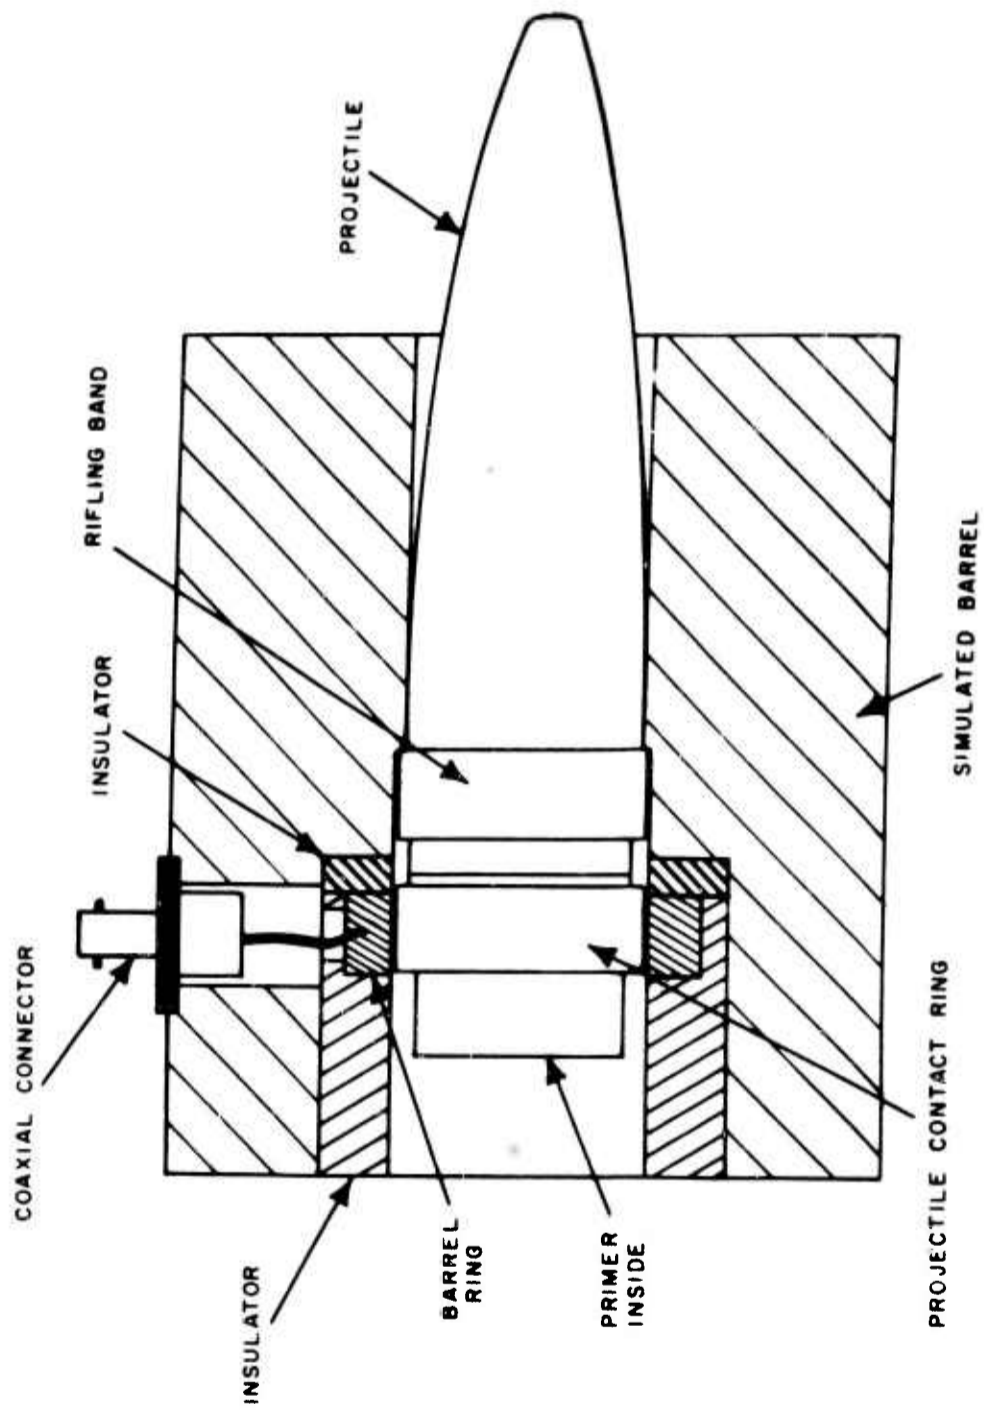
CAPACITOR COUPLING TEST FIRING FIXTURE
